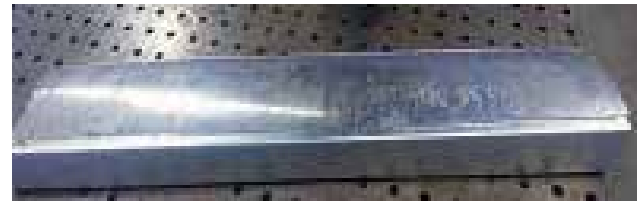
Laser weld-brazed Profile-to-Sheet (Al-Steel)
